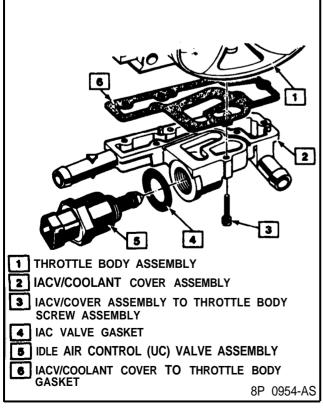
Idle Air Control Valve/Coolant Cover Assembly
